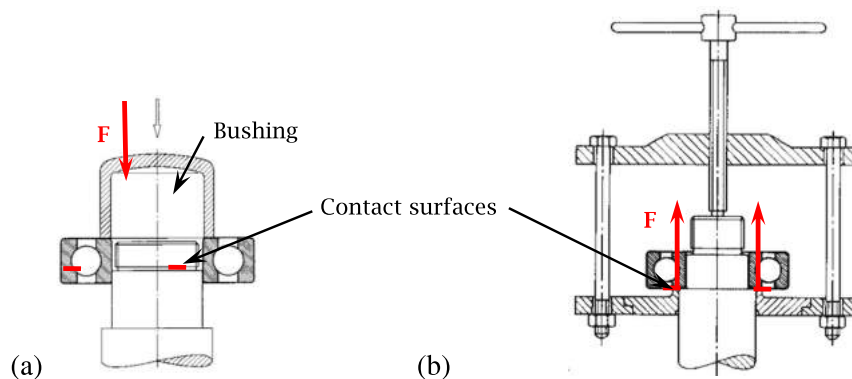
(a) Mounting of a ball bearing using a bushing. (b) Dismounting with a bearing puller (courtesy FAG).
